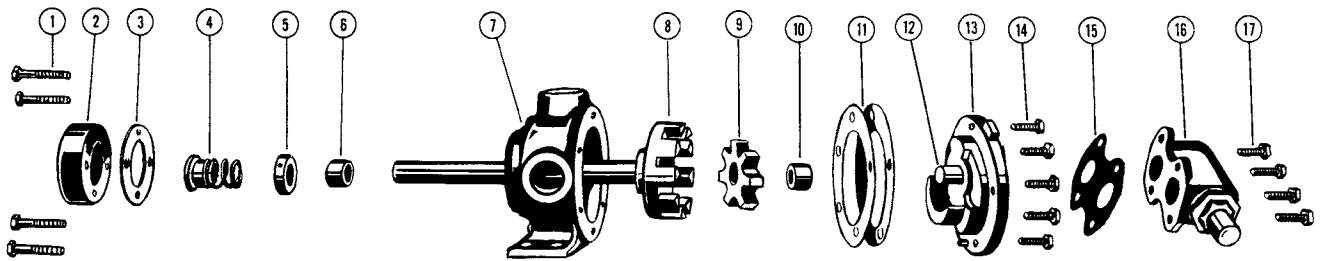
EXPLODED VIEW MODEL H432 AND HL432 PUMP
